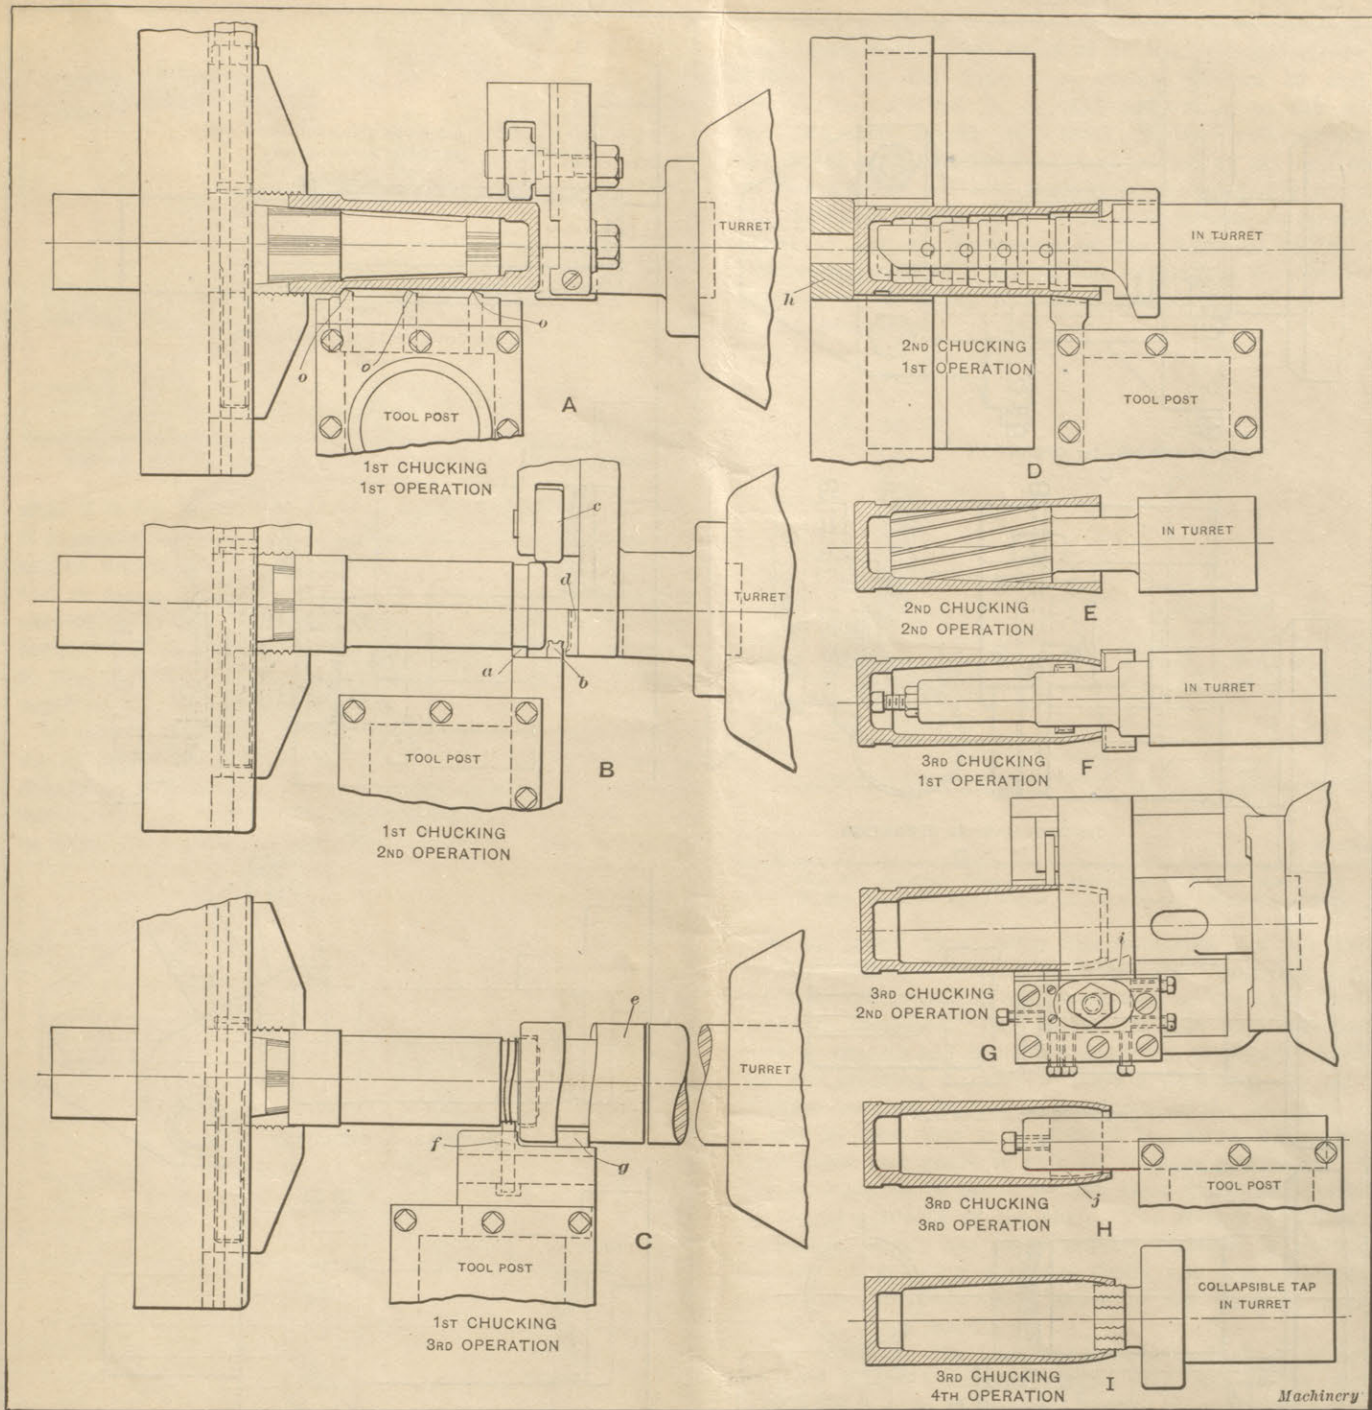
Set-up and Tool Equipment on the "Libby" Turret Lathe for machining Forged Shrapnel Shells
